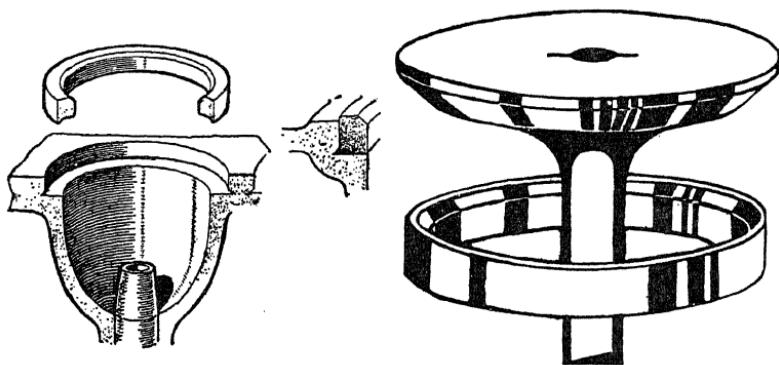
Valve Seat Insert for Cast-Iron Cylinder Block
